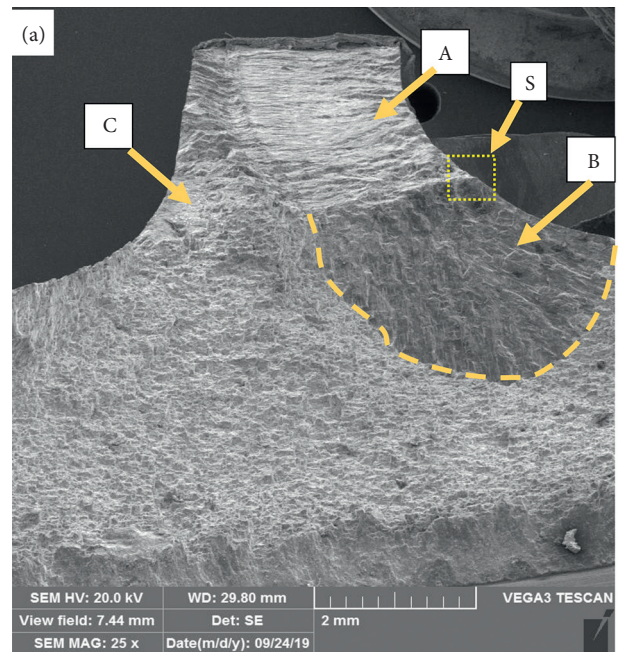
Macrostructure of fracture surface for sample 3.
